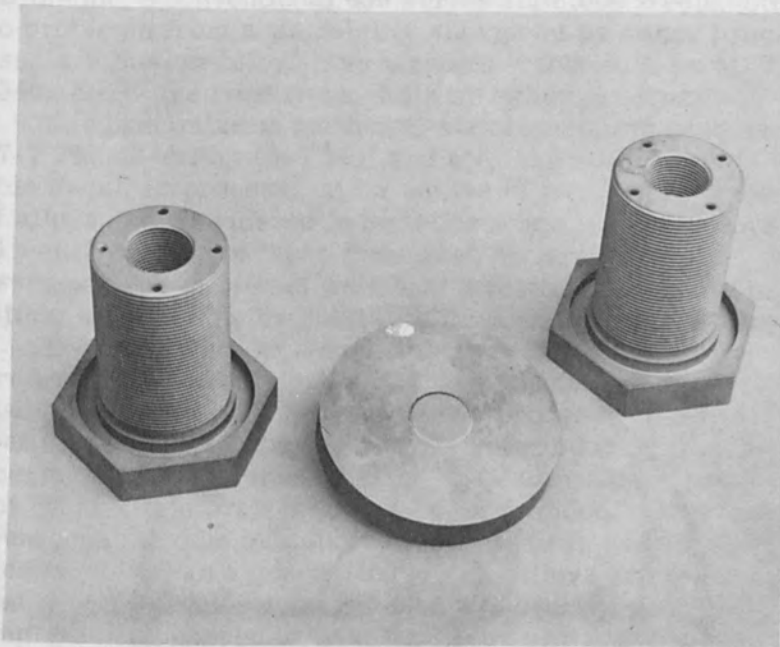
Illustrates the Laser welding capability of joining very thin metal to very thick material. The burst disc is made of type 316 stainless steel simply lap welded to the type 321 3/8" thick heavy block. The center member is the simulated test piece used to develop the Laser welding schedule. The two production units shown on each side depicts the capability of the light beam to weld into deep holes.
